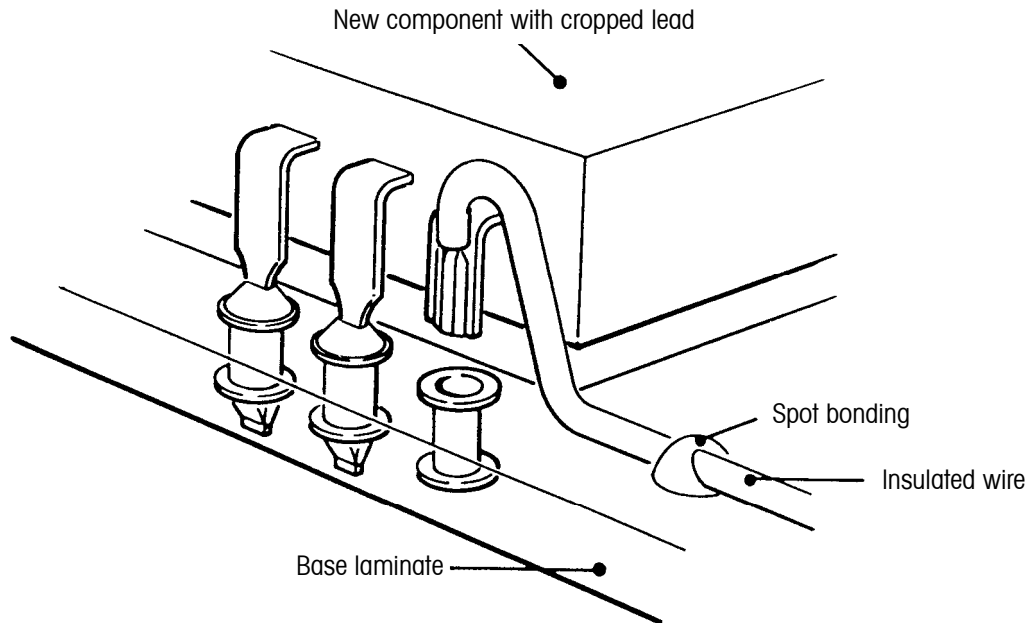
Mounting a dual-in-line package with or without a wire link soldered onto a cropped lead (wire link passing away from board)
